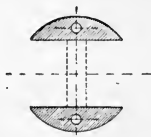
End Stampings for Laminated Shuttle Armature.
